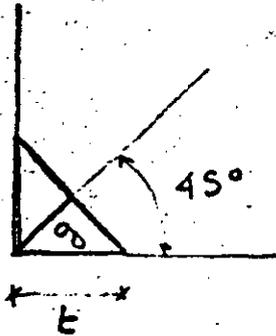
Details for fillet welds. All dimensions in inches
